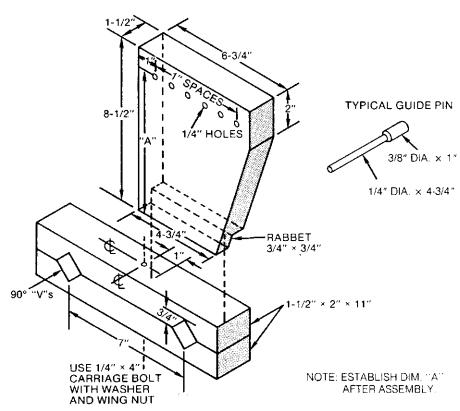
Construction details of the hole-spacing guide. The text tells how to accurately determine dimension "A."
